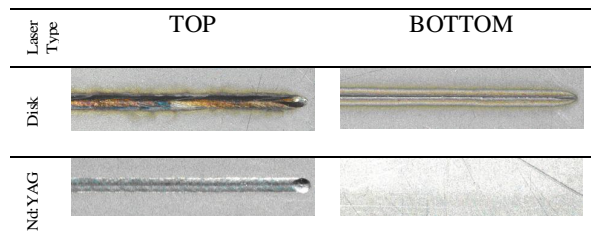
Top and bottom surfaces of weld seams produced by disk and Nd:YAG lasers at 60 mm/s and 1000W laser power (image width 20mm)
